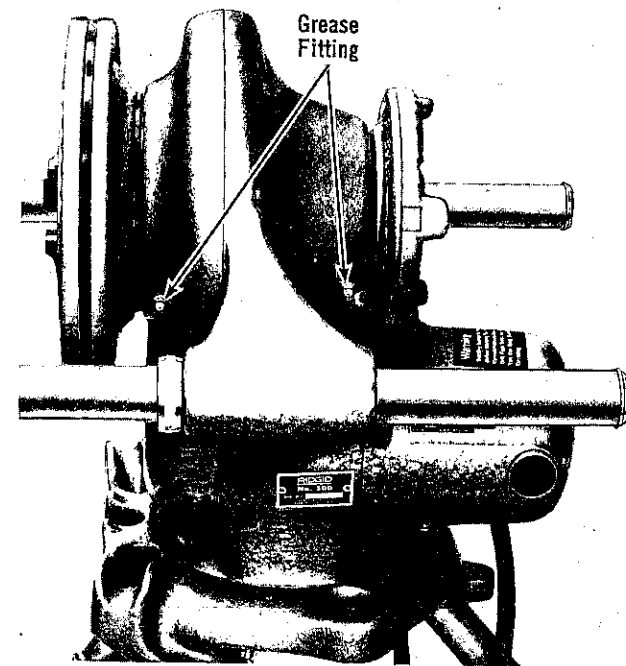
Power Drive Main Shaft Bearings Grease Fittings.
